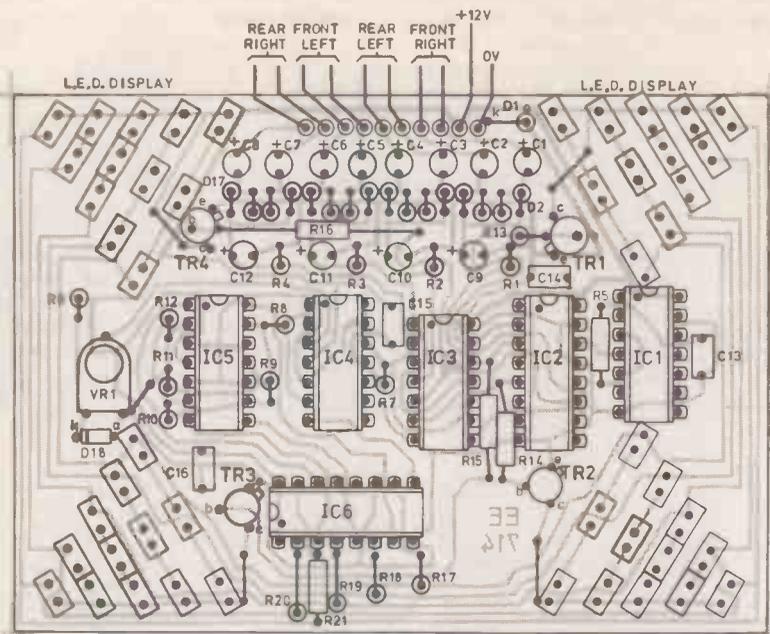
Printed circuit board component layout and full size copper foil master pattern. The method of mounting the diodes and l.e.d.s is shown above.
